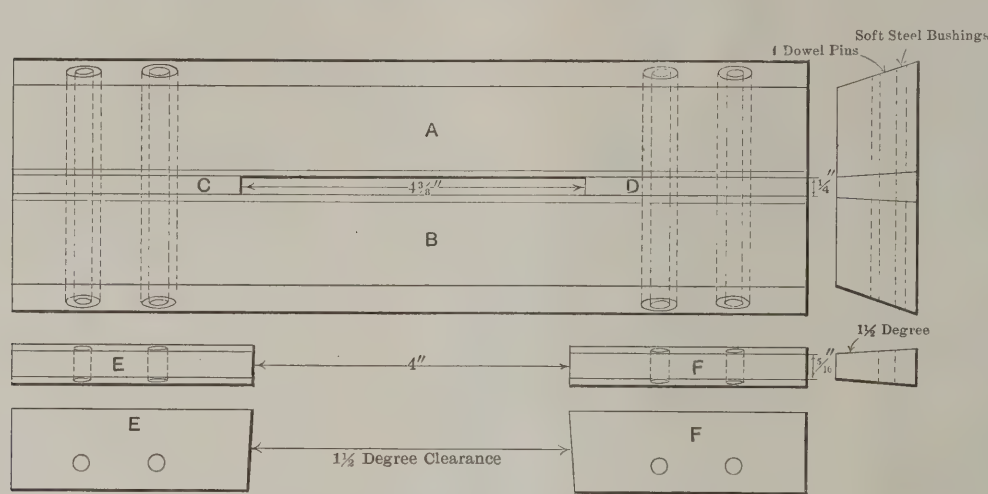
Die with Interchangeable Parts, permitting Two Sizes of Blanks to be Punched by Changing the Center Pieces only.
